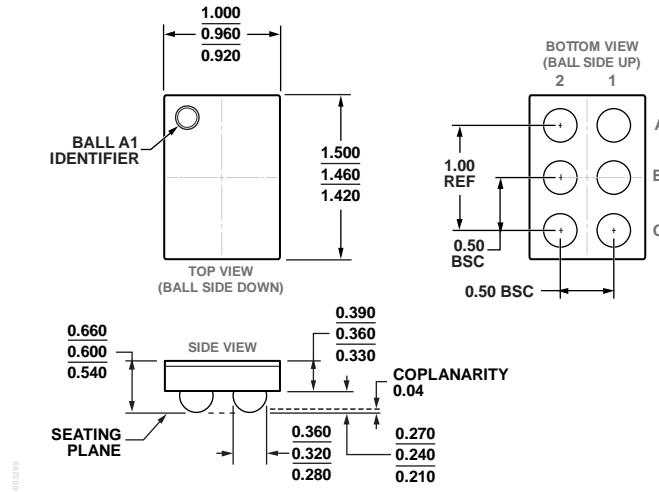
6-Ball Wafer Level Chip Scale Package [WLCSP]
